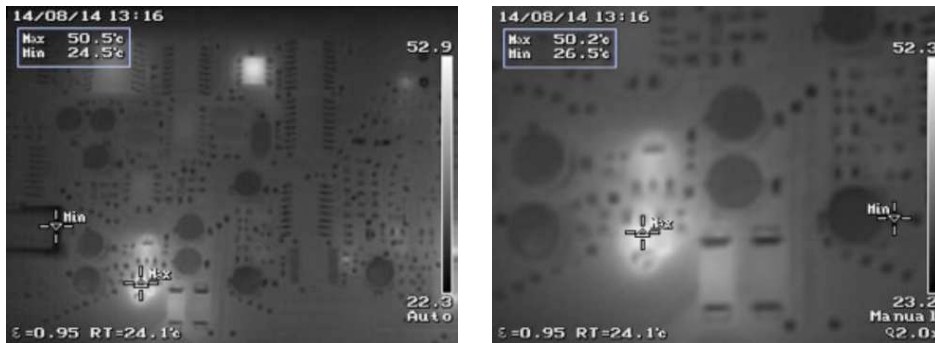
Thermal image of PCB board and its corresponding image zoomed into the hottest point
